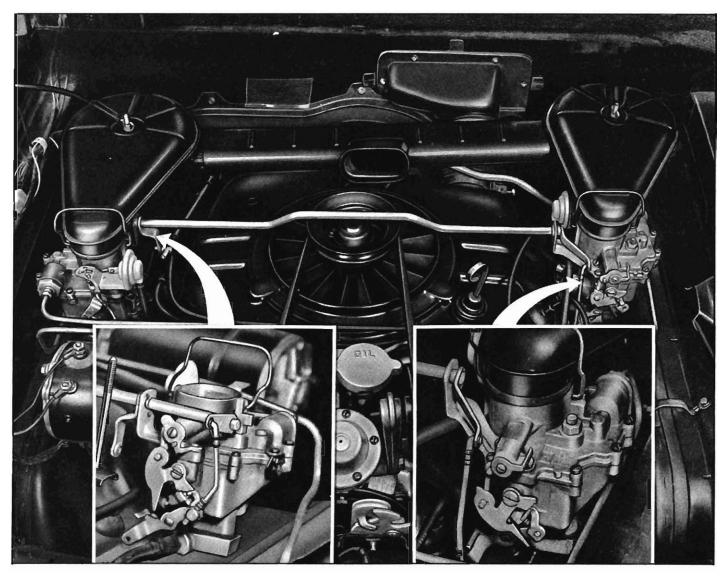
Cross-Shaft and Carburetor Linkage.
